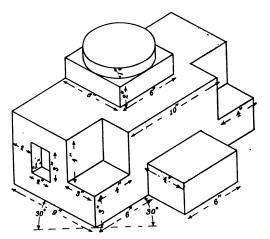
Isometrical Drawing of an Object Shewing Method of Scaling the Measurements.
